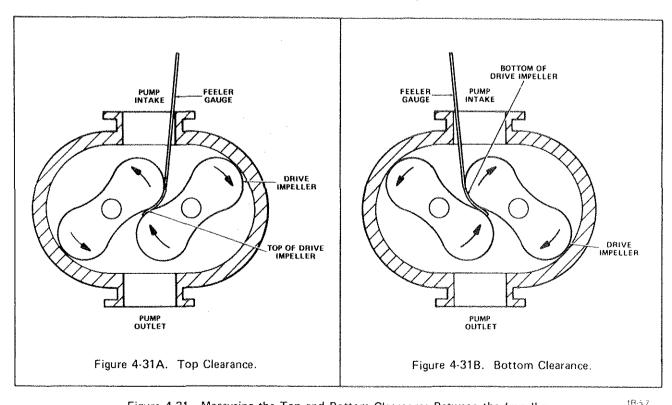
Measuring the Top and Bottom Clearances Between the Impellers,
